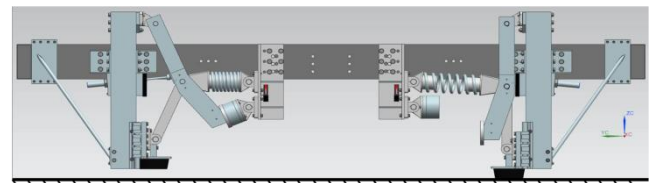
CAD model of the lifting system (left: actively held; right: discharged)
